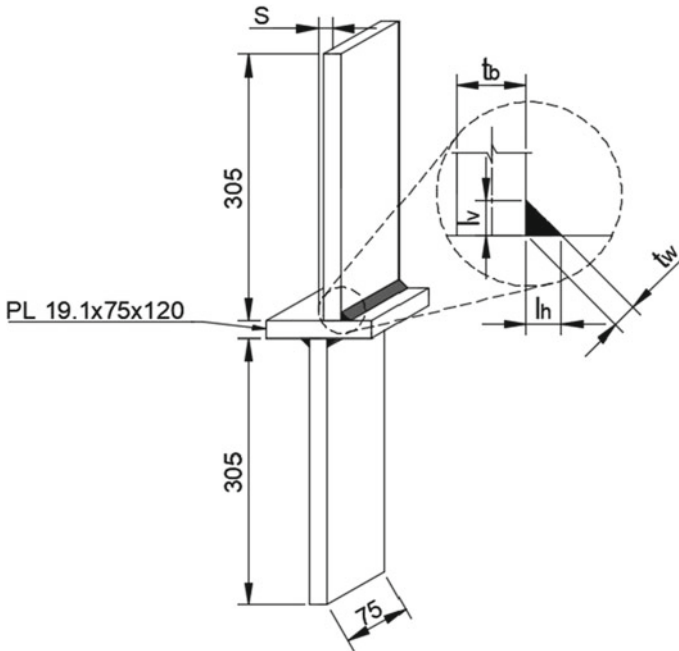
Schematic diagram of single-sided fillet weld connection specimens
